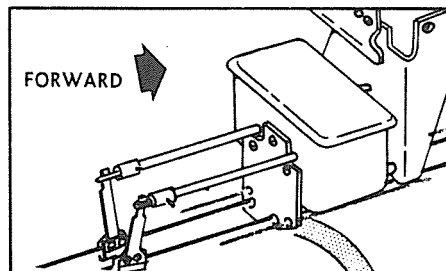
(Sheet 1 of 8 Sheets). Throttle Control System — Key Drawing
